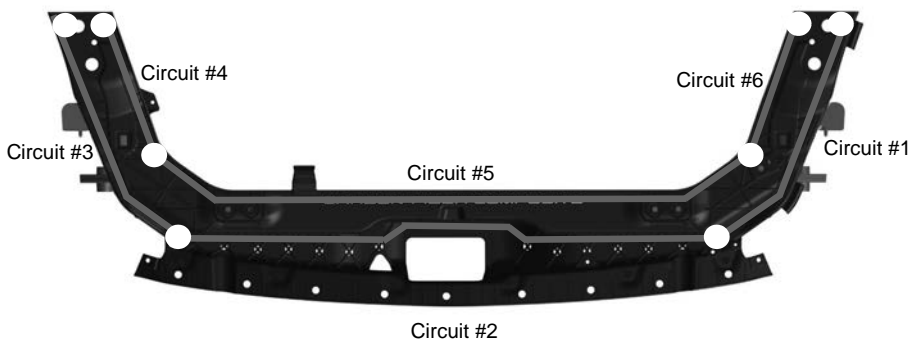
The 6 different weld circuits required to weld the GT350 GOR.
